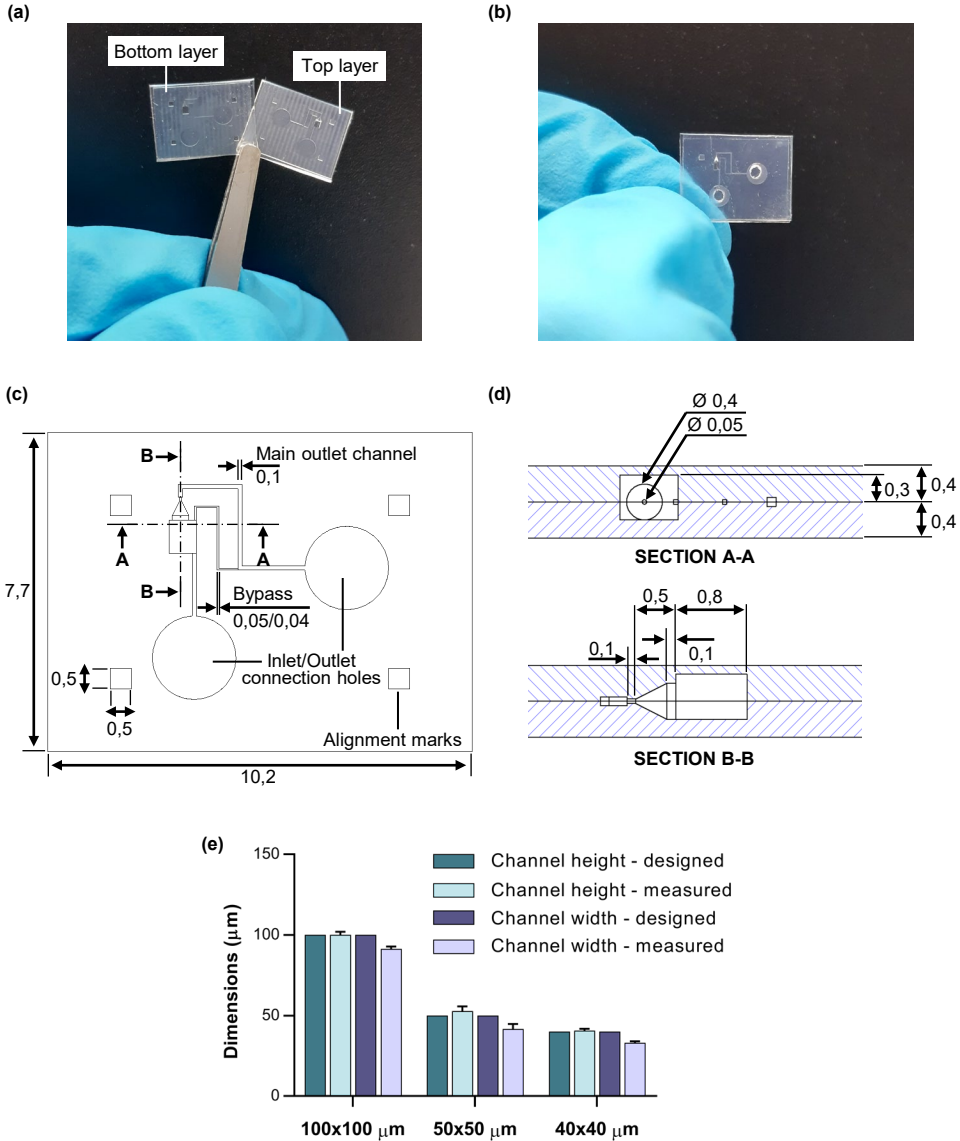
D1: Micro-pencil device design and relevant dimensions. (a) Replica-molded top and bottom layers, and (b) bonded micro-pencil device used for the *in vitro* experiments. (c) Schematic top view of the channel layout and relevant dimensions in mm. (d) Cross-sectional views of the device showing the actuation chamber shape and key dimensions in mm. (e) Graph indicating the differences between the measured channel dimensions and the initially designed ones. The data represents the mean \pm SD ($n = 3$).
